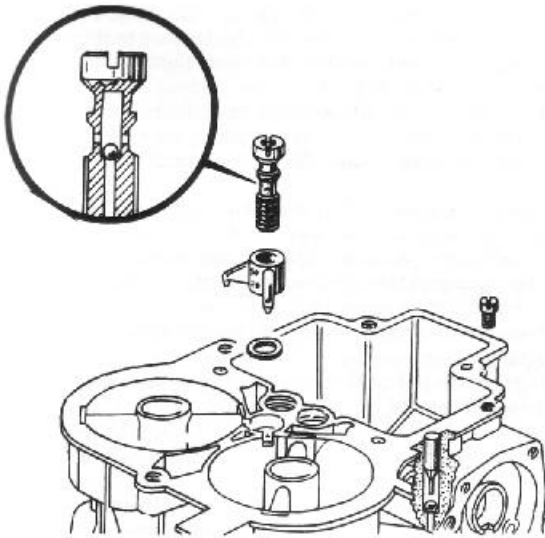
Location of the accelerator pump ball valve (Sec 7)
